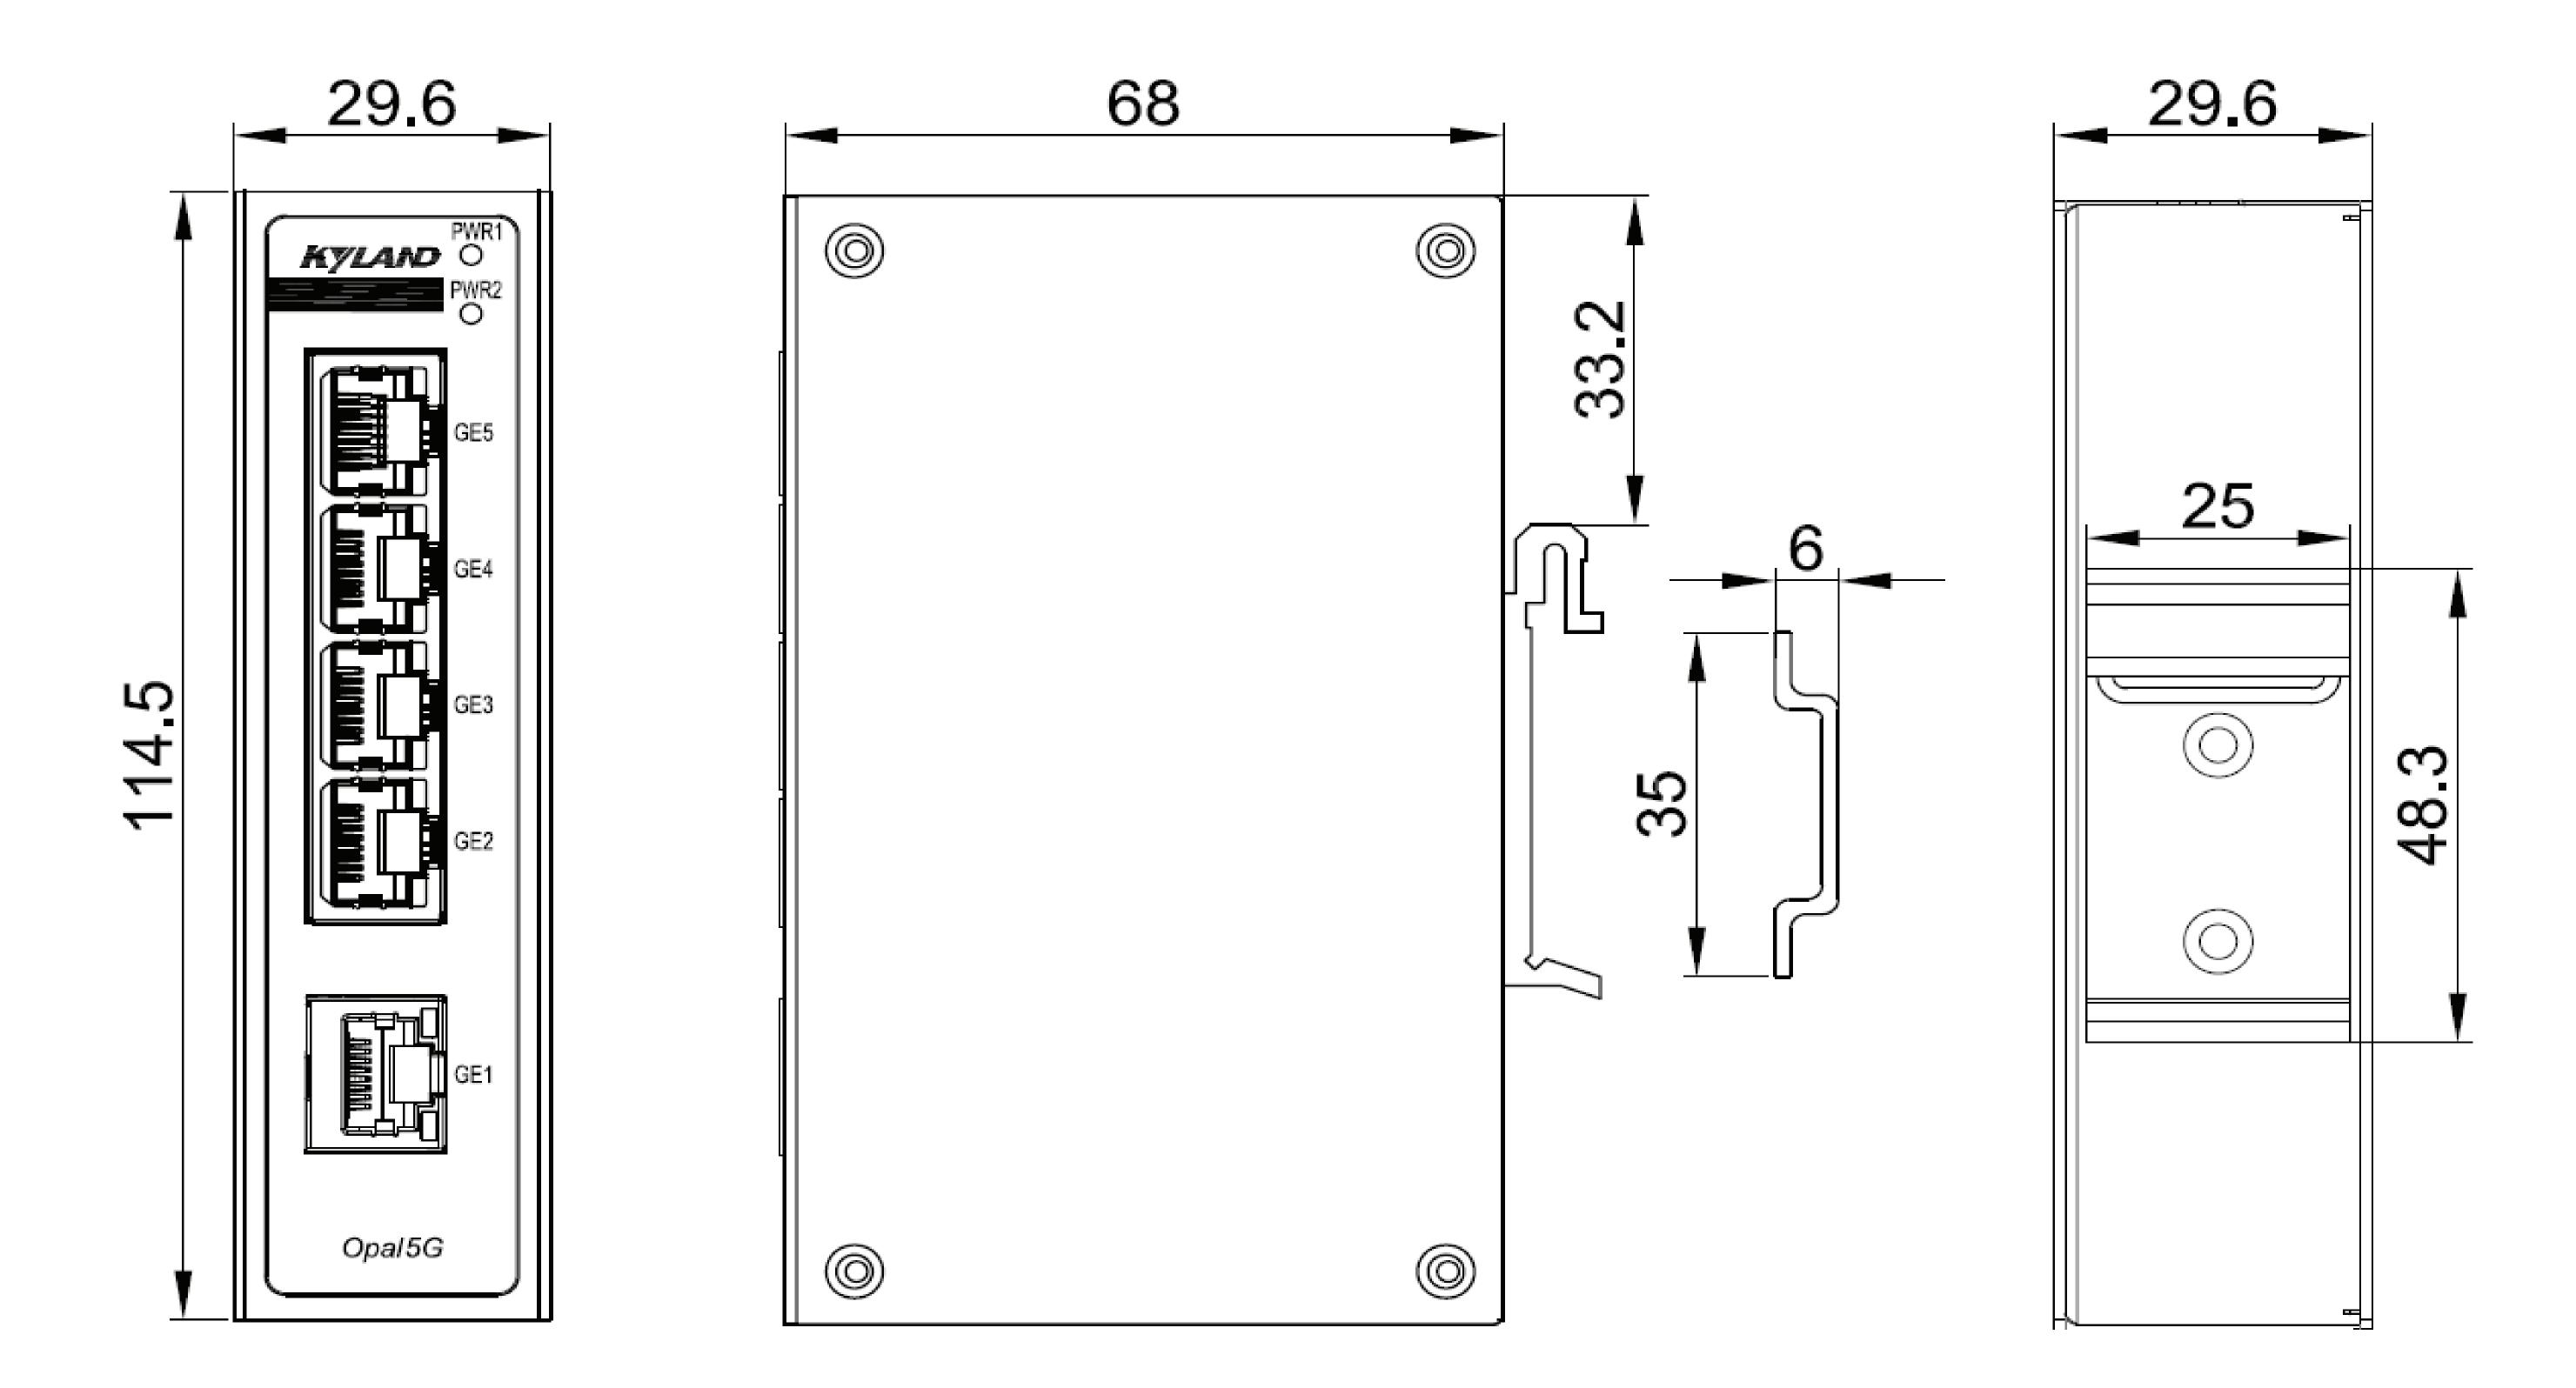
Opal5G Dimensions for DIN-Rail Mounting (unit: mm)
